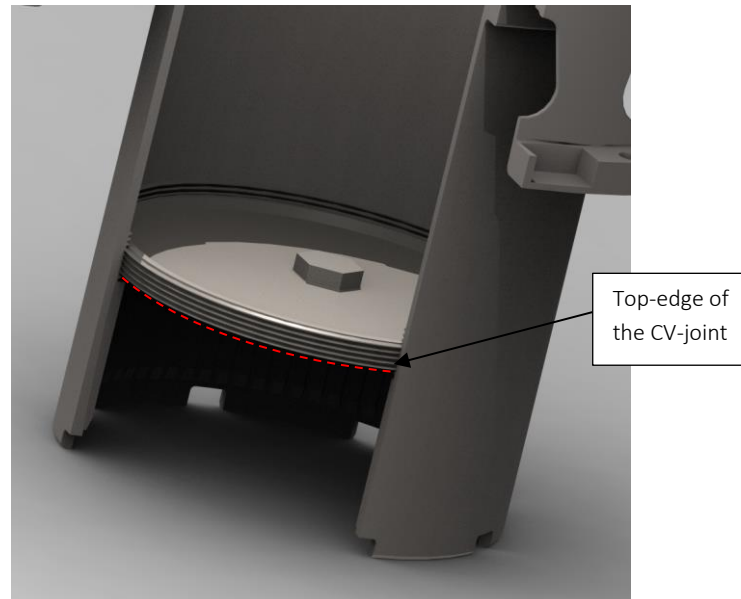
Cup assembled in the Wheel Hub (Quarter section-view of Hub)
